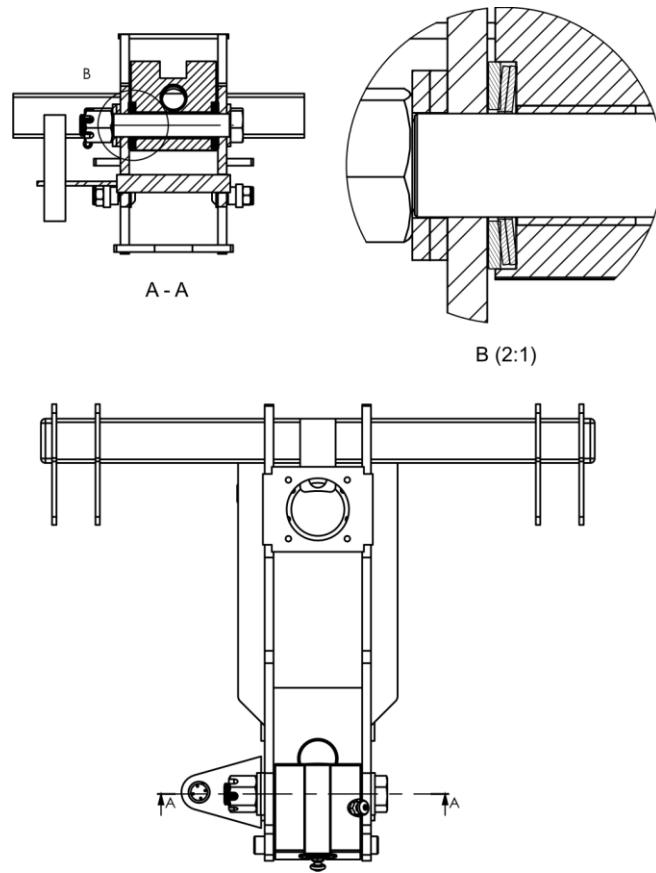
Arrangement of spring washers on gimbal head - Version II
